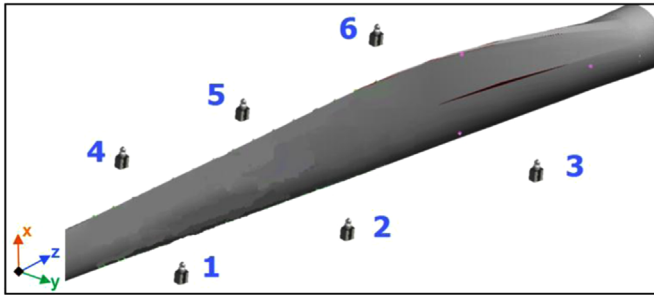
Inspection locations required for complete inspection of a 60 m blade using LR.
